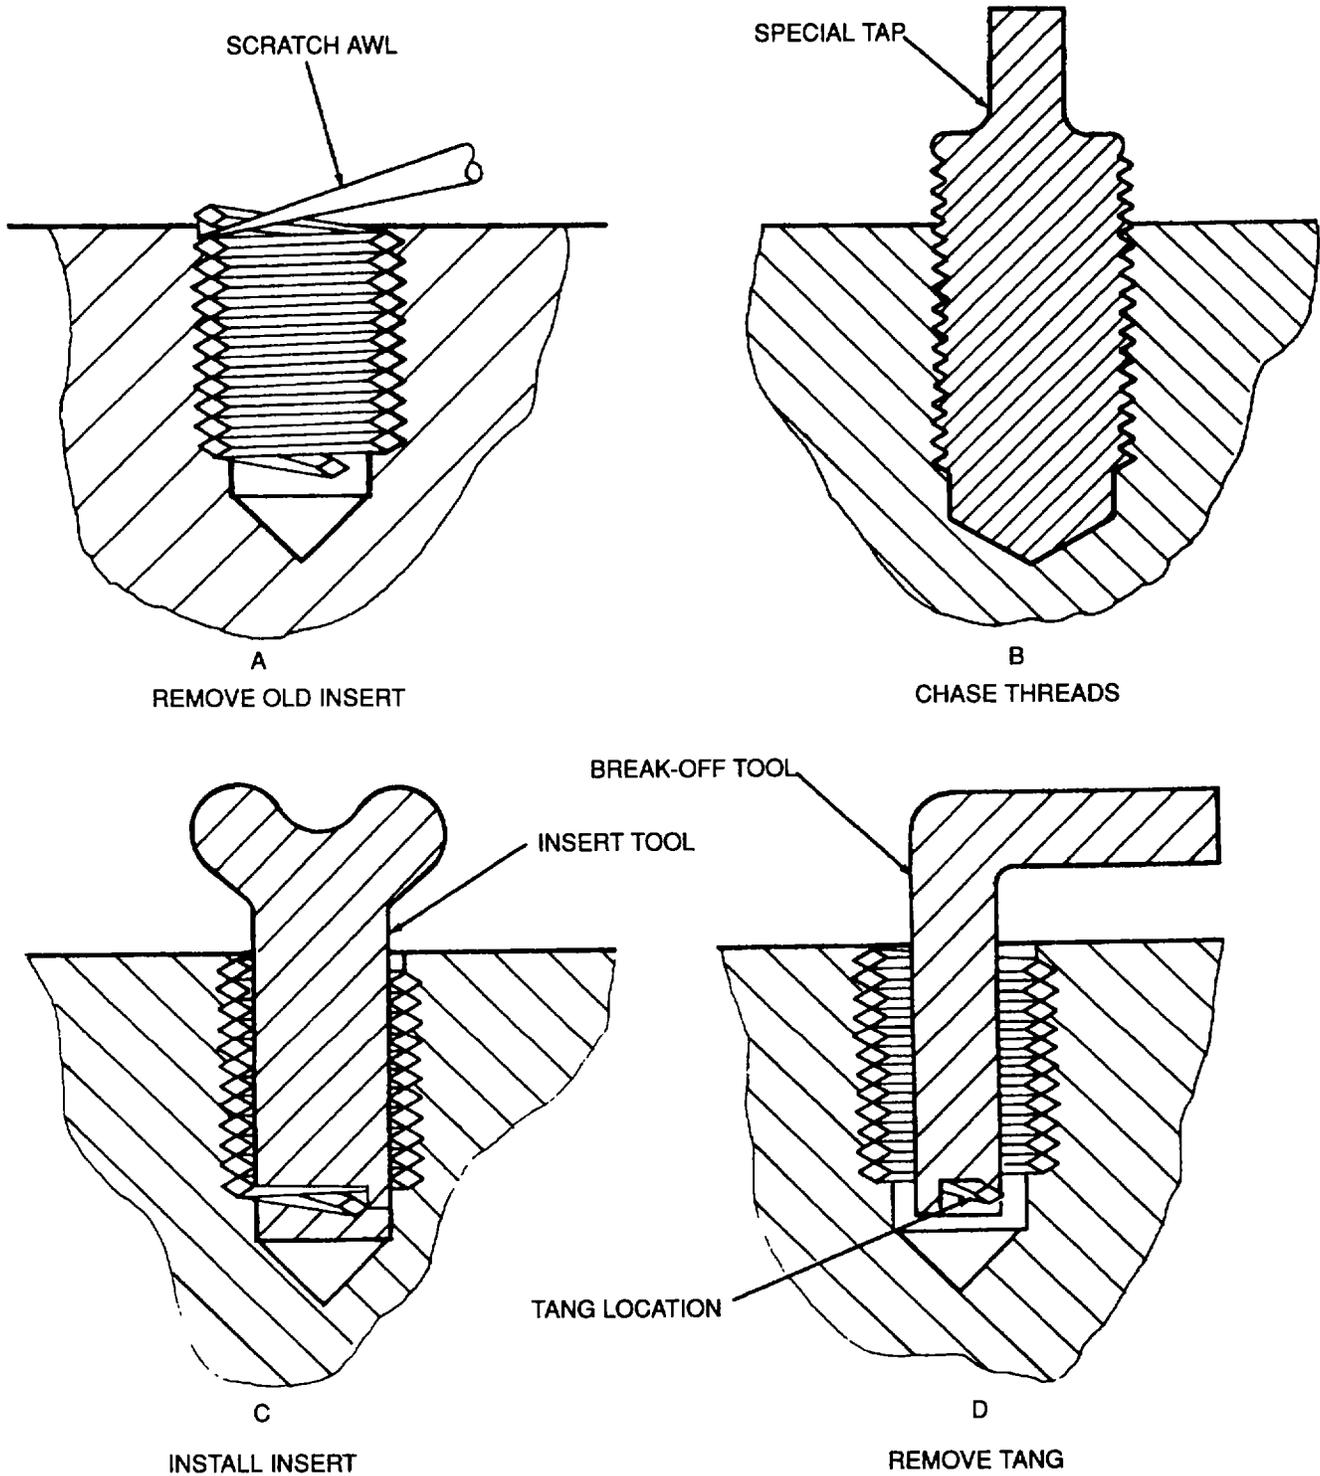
Removing and Installing Helical Coil Thread Inserts
